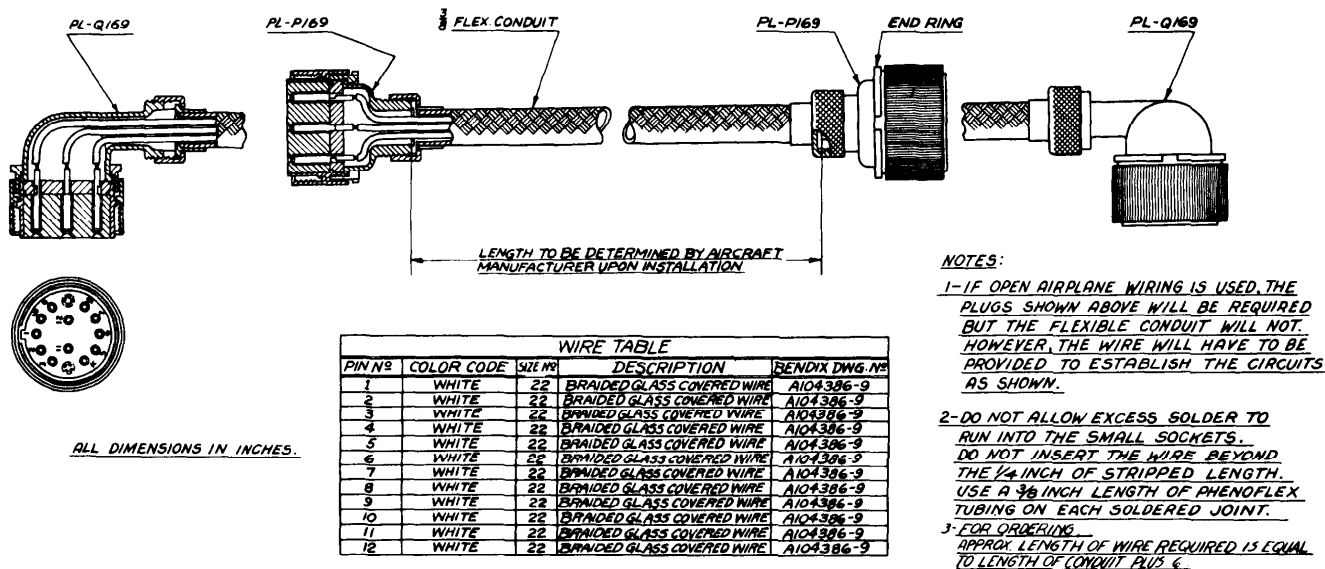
CABLE, JUNCTION BOX TO RADIO CONTROL BOX, ASSEMBLY DRAWING
